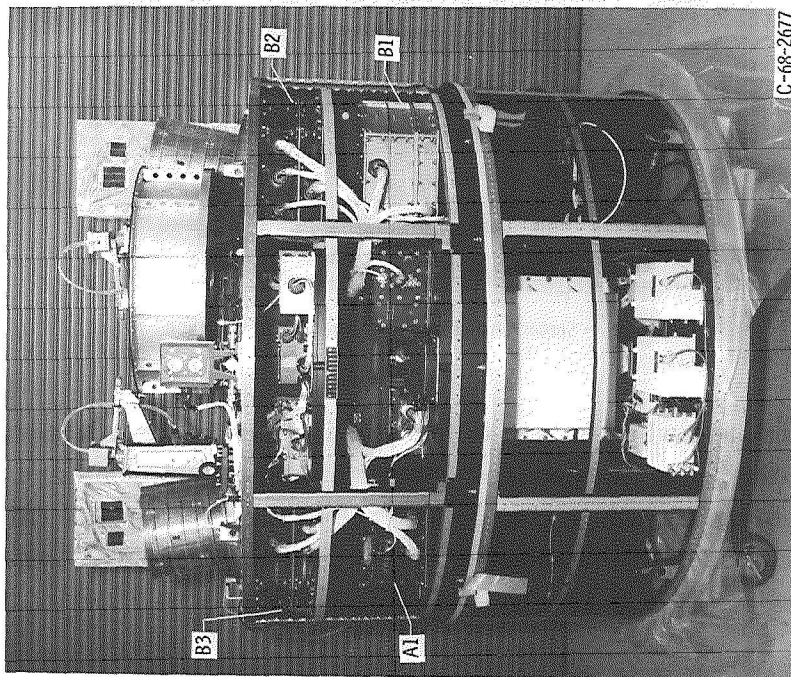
Spacecraft and spacecraft support unit component mounting.
